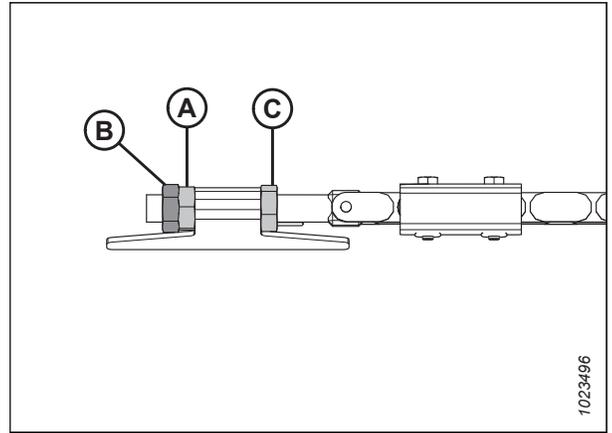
Chain Adjustment Bolt – Left Shown, Right Similar
